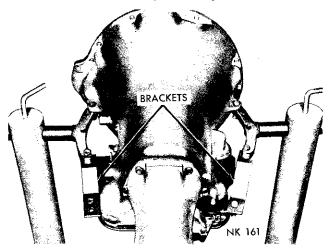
Transmission Installed in Repair Stand (Tool DD-1014)
